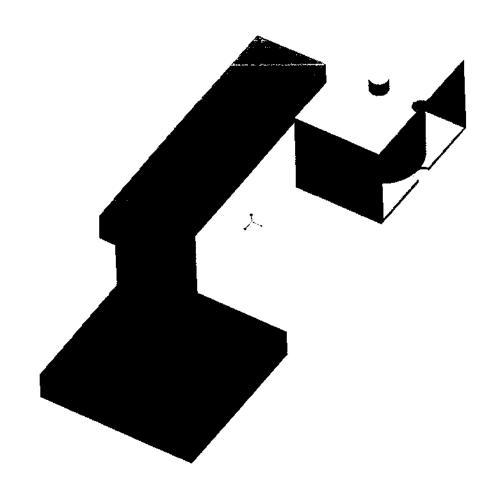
ENAMEL REMOVAL ATTACHMENT
